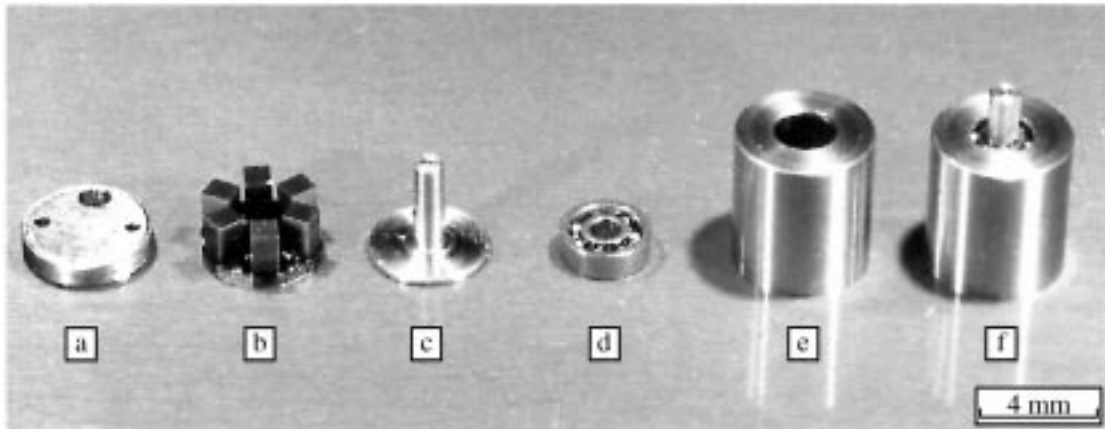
Motor details, (a) base plate, (b) stator, (c) rotor, (d) ball bearing, (e) housing and (f) a fully assembled motor.
